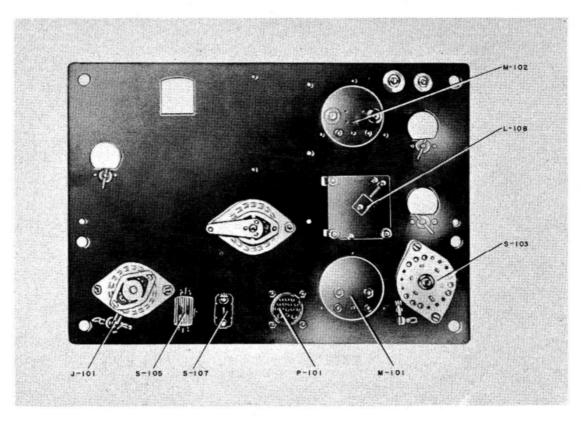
Transmitter Front Panel — Inside View (older model shown; see note for Fig. 1)
